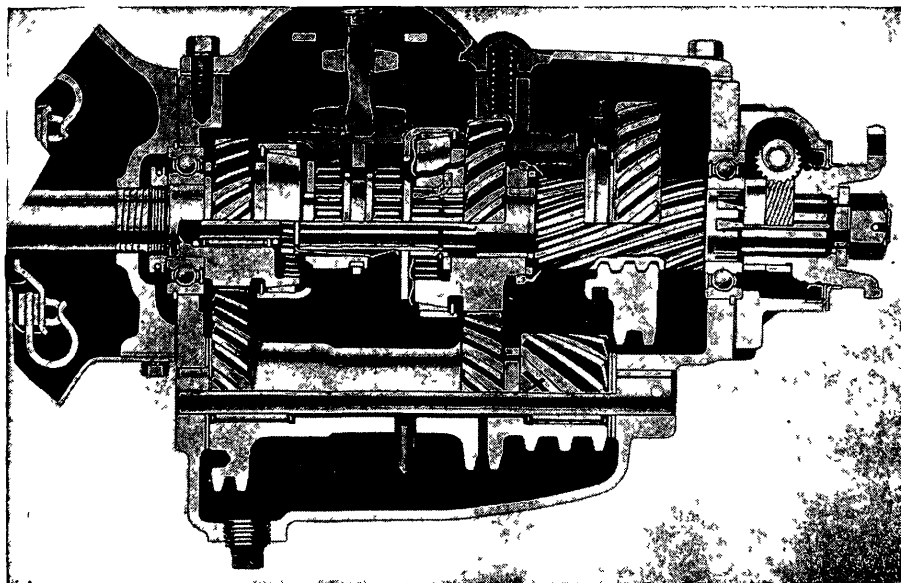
Transmission 1935-36 La Salle; 36-60 Cadillac
